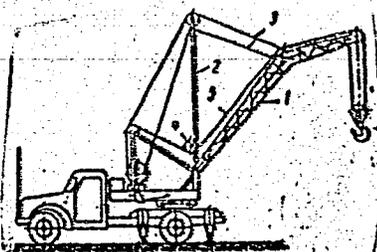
1 - boom; 2 - strut; 3 - boom pulley system; 4 - diverting pulley; 5 - load cable.
